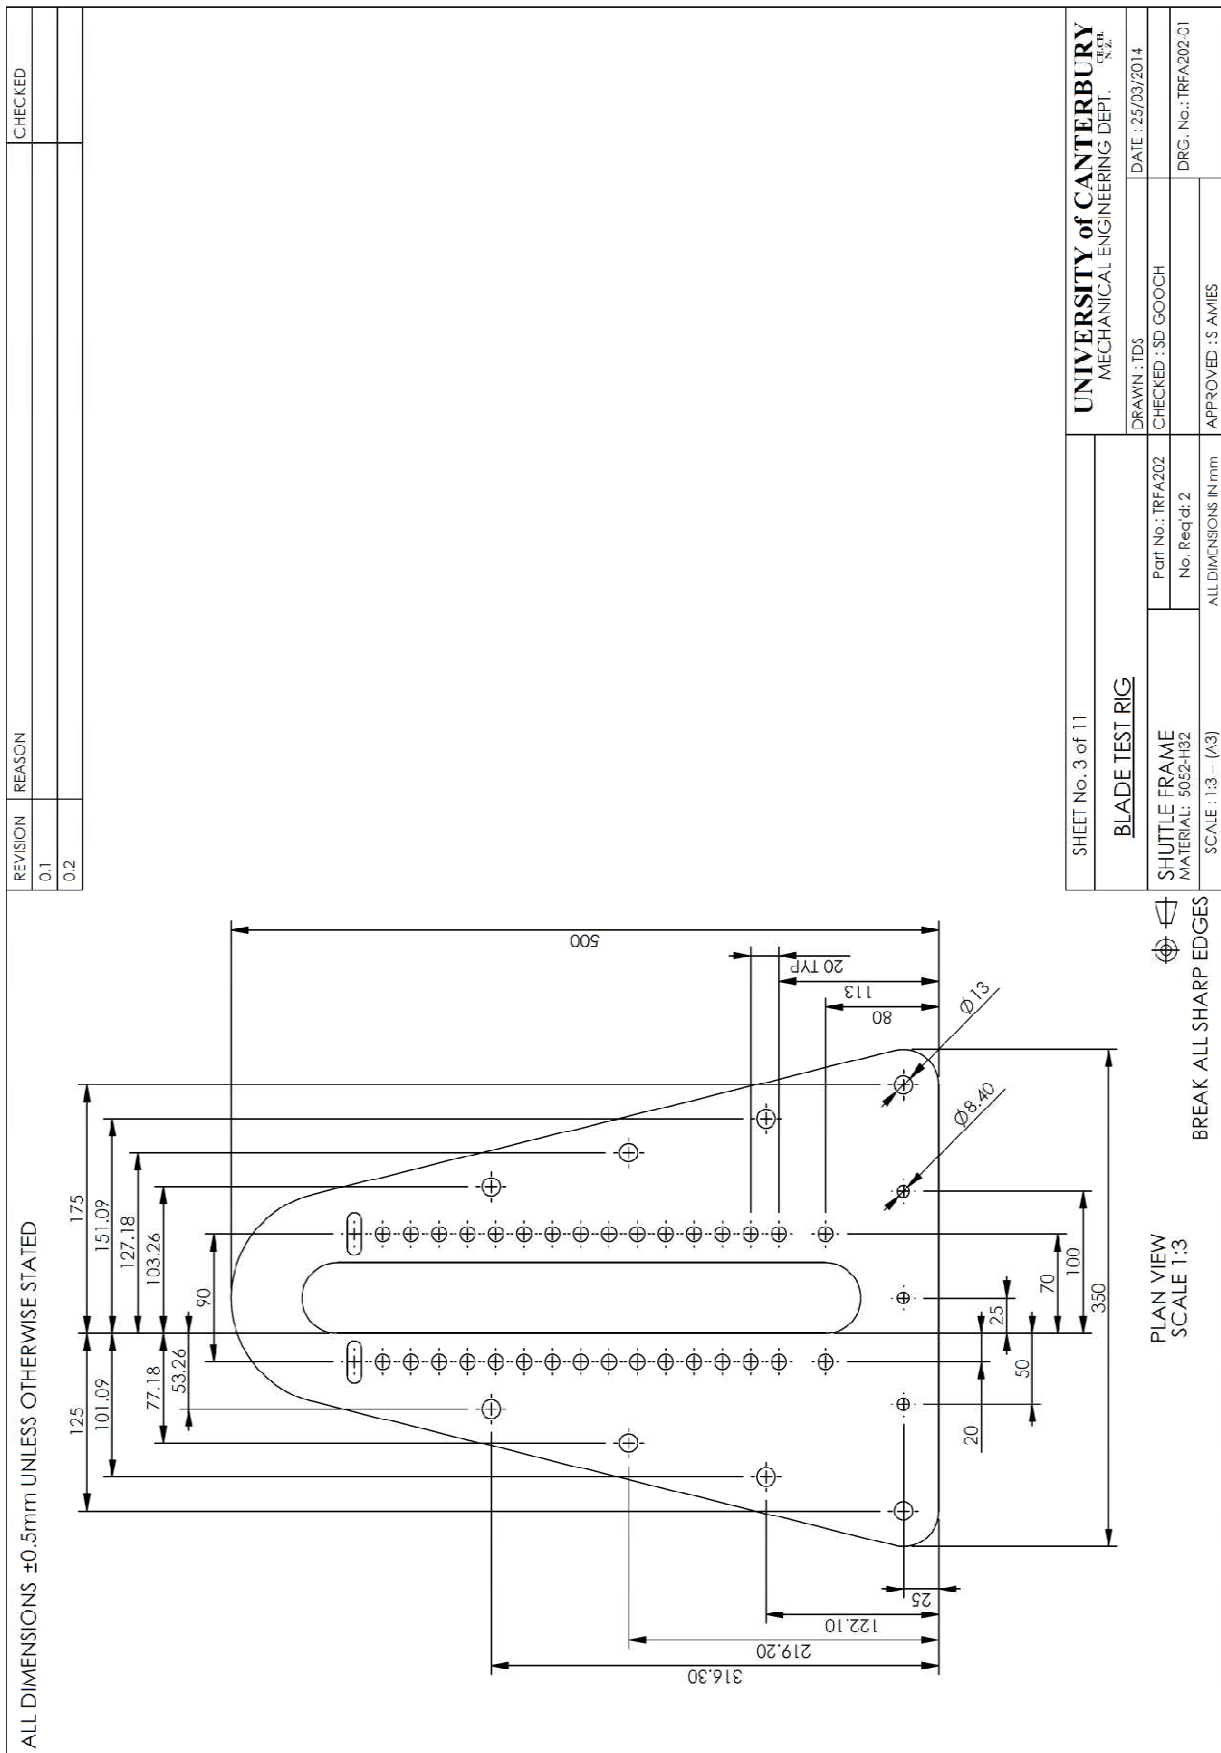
Manufacturing drawing of shuttle frame in fatigue test rig.
